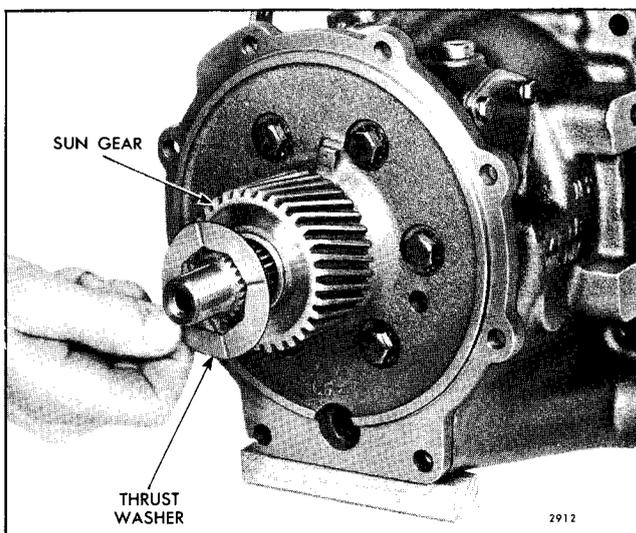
Installing Thrust Washer on Hub of Sun Gear (2.1:1 Ratio)
